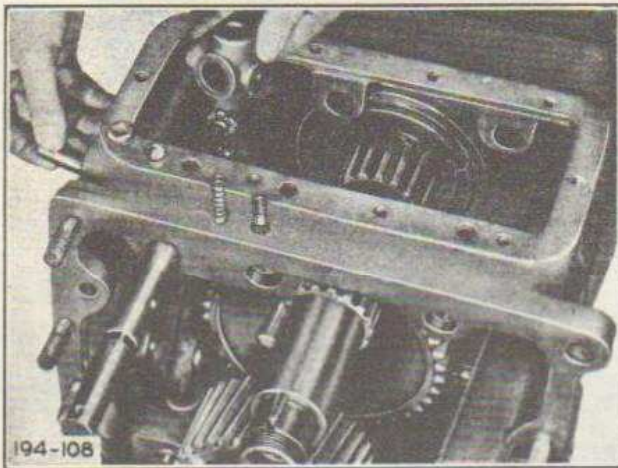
Installing Interlock and Front Drive Shifter Shaft
